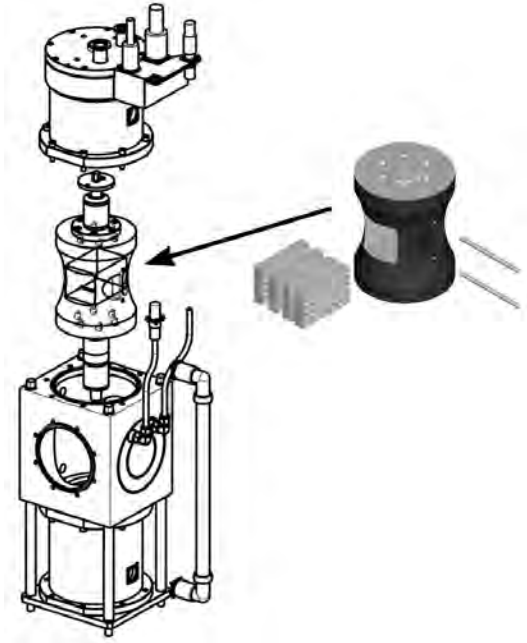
Exploded view of ARCS Fermi chopper, showing housing and rotor at left. The slit packages are held into the rotor with two pins, as shown at right.
